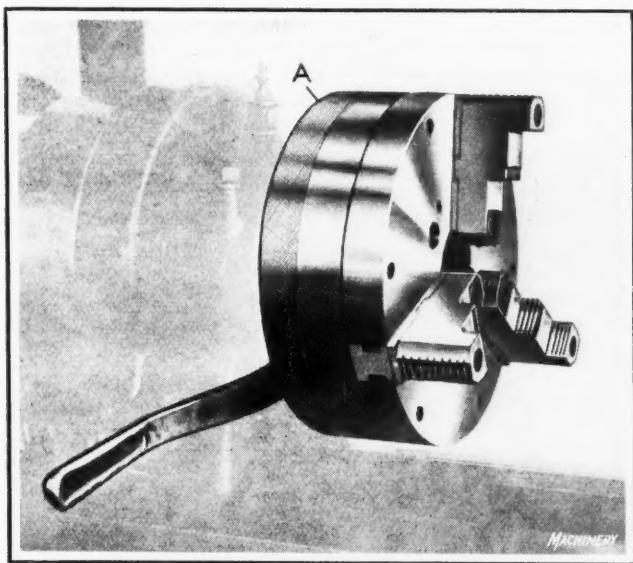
Differential-gear scroll chuck designed by the E. Horton & Son Co.
